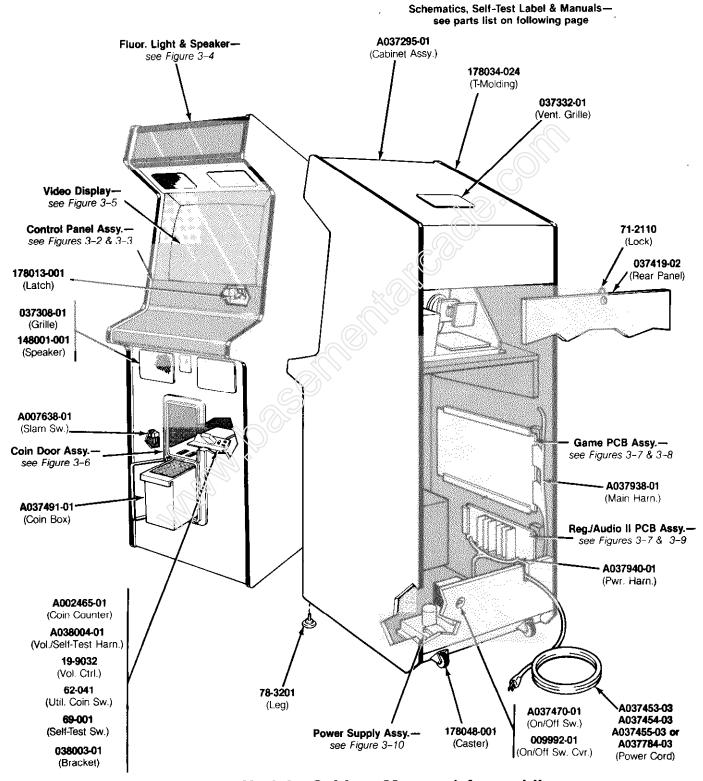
Upright Cabinet-Mounted Assemblies A037294-xx A
